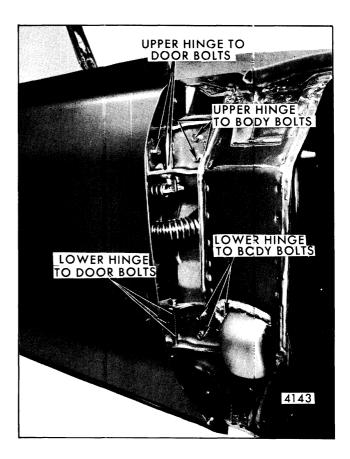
Typical Front Door Hinge Attachment - All Except "X" Styles
